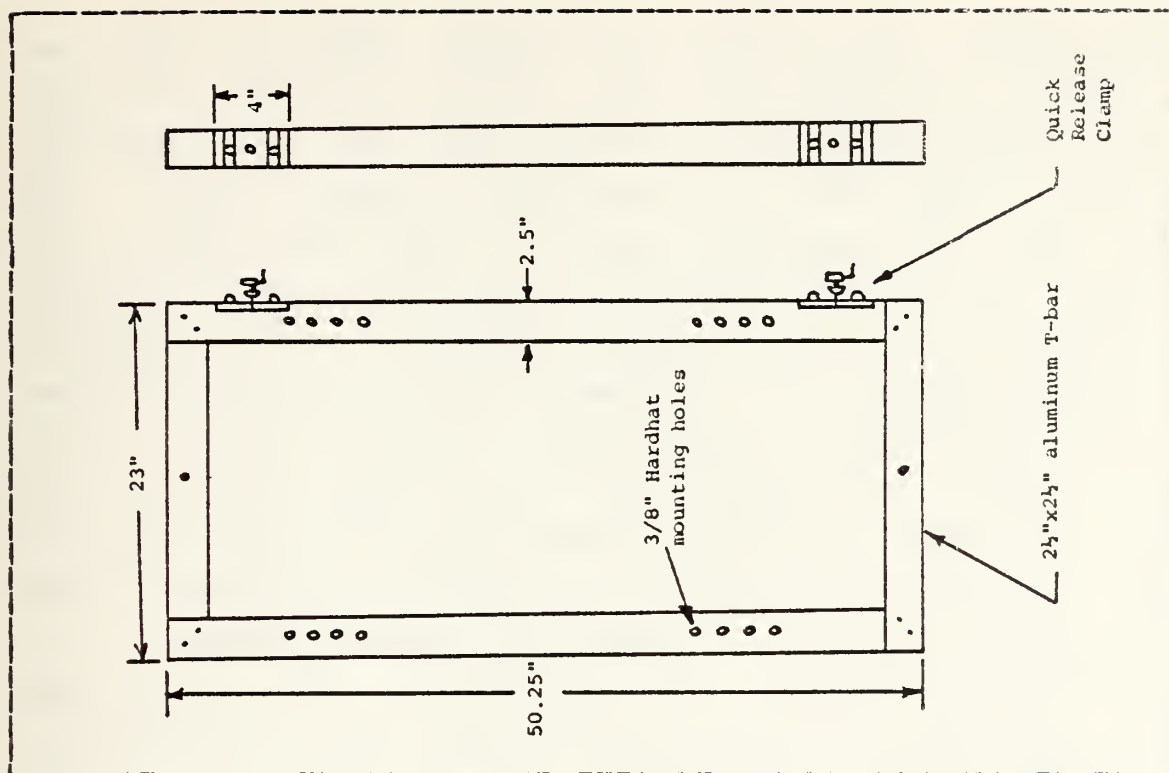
Instrumentation Subsystem Equipment Mounting Assembly
